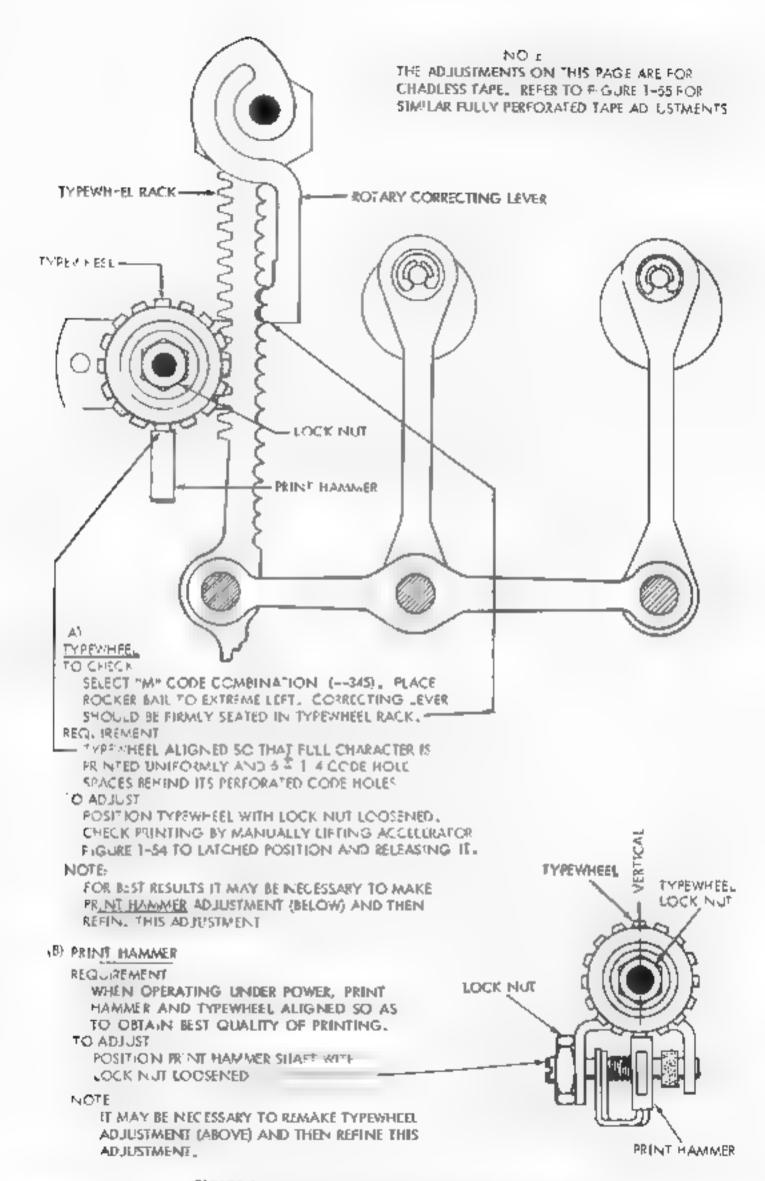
, PRINTING MECHANISM FOR CHADLESS TAPE
